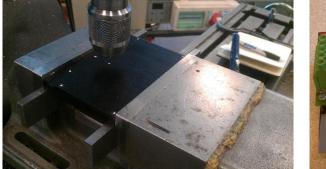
Drilling holes in heat sink suitable for the inverter circuit board
